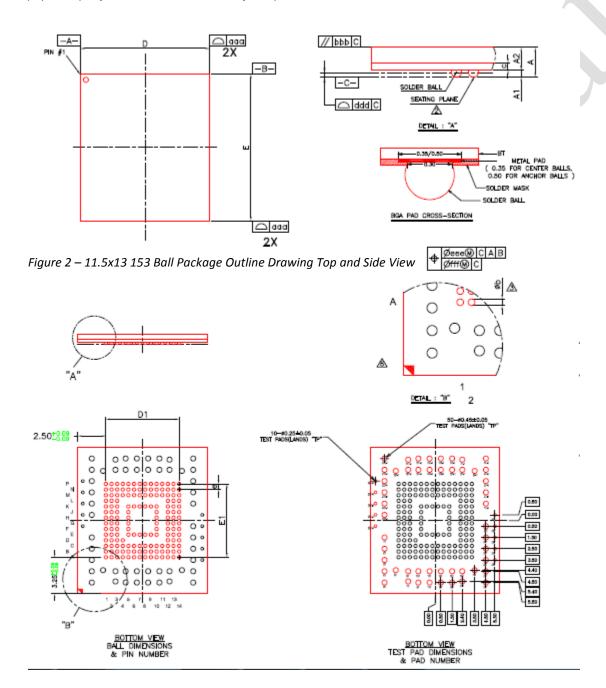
11.5x13 153 Ball Package Outline Drawing Bottom View
